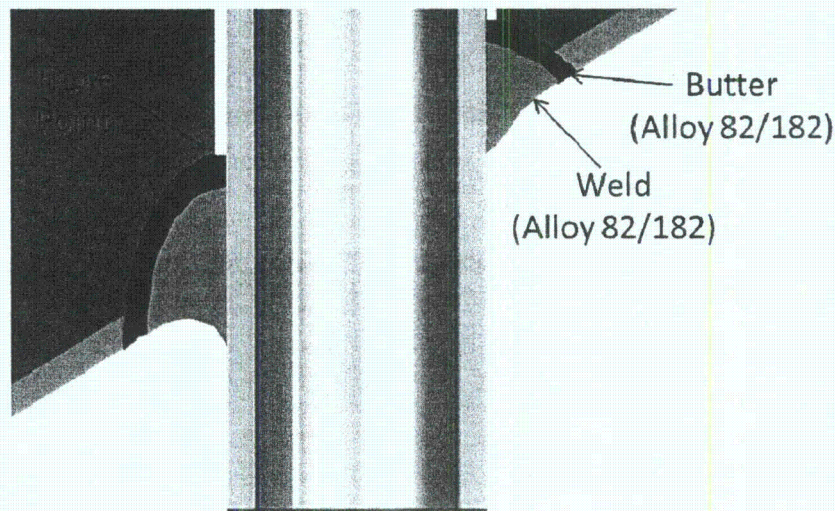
CRDM J-groove Weld Schematic
